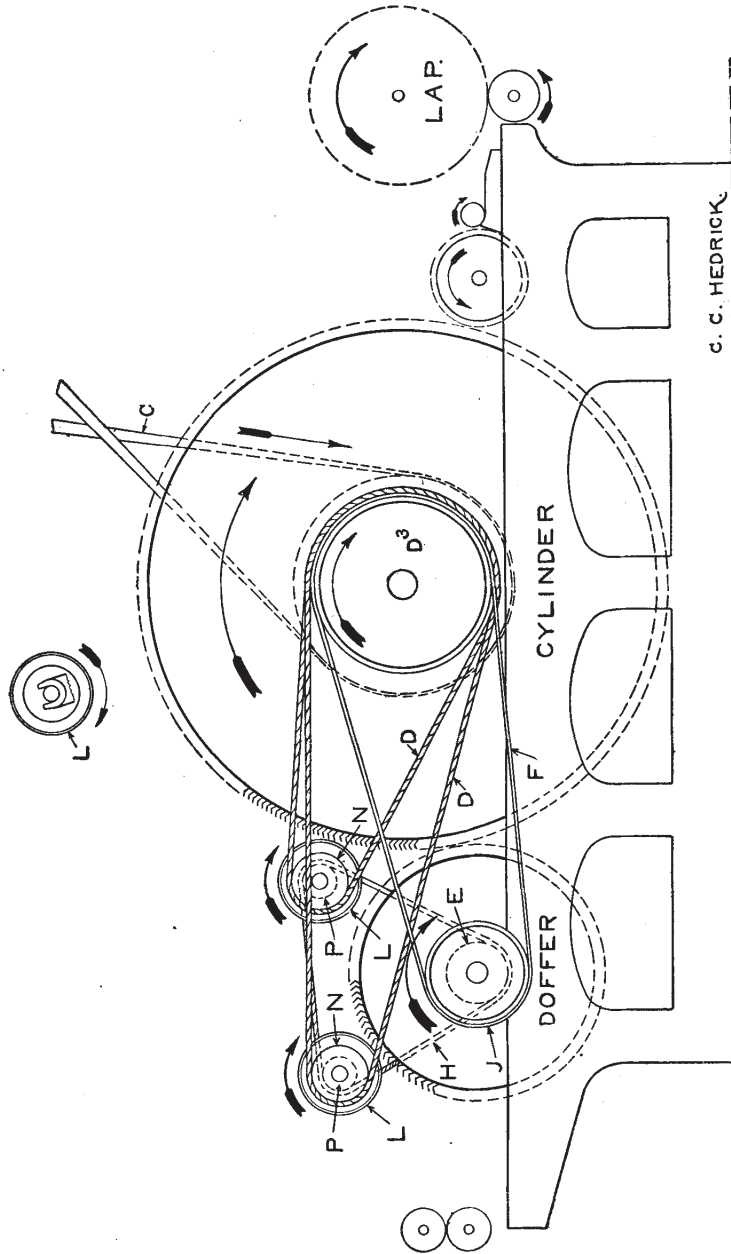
Elevation of Card Showing Belting used in Grinding.
